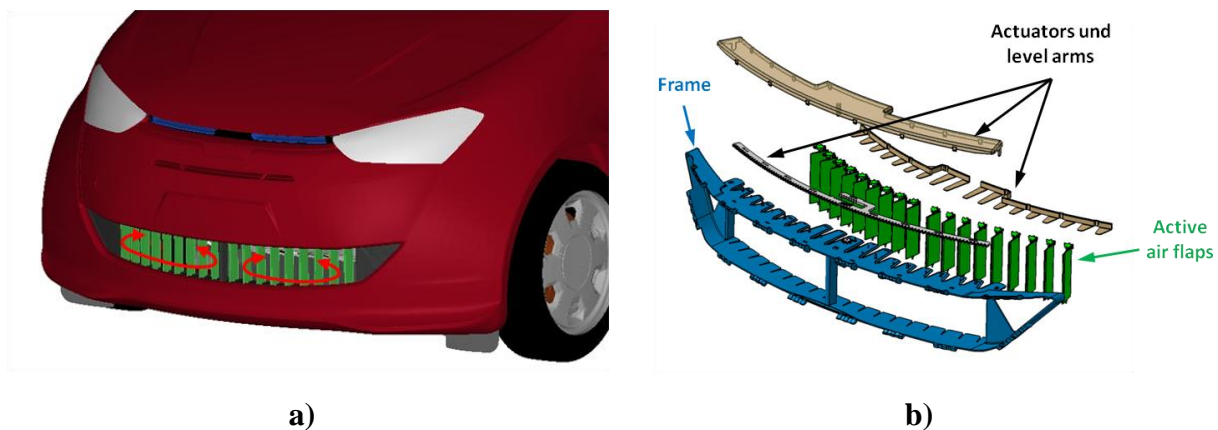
a) Air flaps at cooling air inlet, b) Parts of the assembly of CAS mechanism
